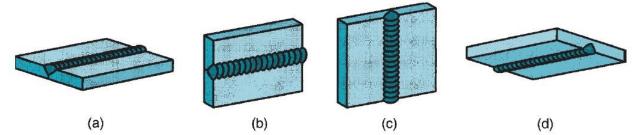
Welding positions (defined here for groove welds): (a) flat, (b)horizontal, (c) vertical, and (d) overhead.
